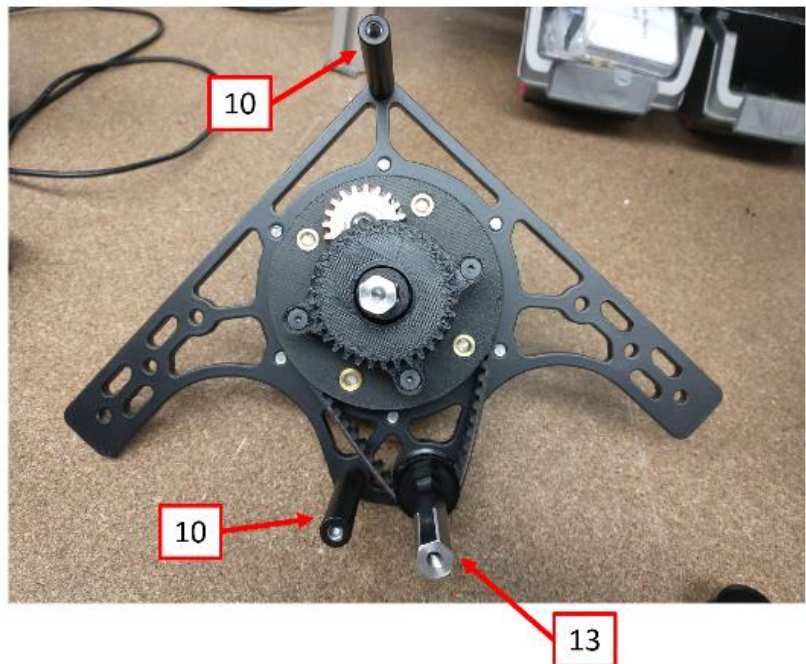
Spacers and Steer Shaft Added to the Bottom Plate
